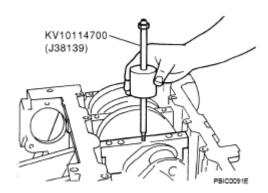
Using SST To Remove Main Bearing Cap Courtesy of NISSAN MOTOR CO., U.S.A.
